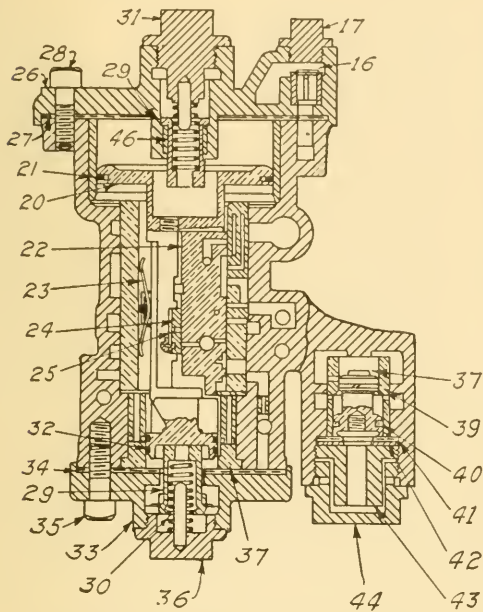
Section through Equalizing Portion of Westinghouse "3-E" Control Valve
